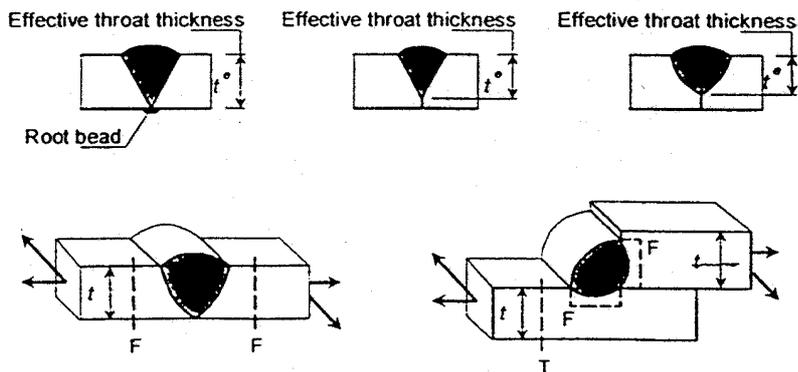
Failure planes HAZ adjacent to a weld; F = HAZ, fusion boundary; T = HAZ, toe of the weld, full cross section
